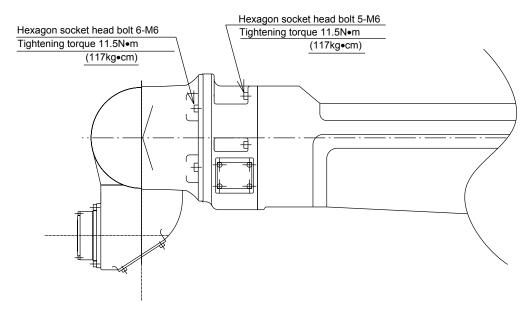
Wrist Fixing Bolts (for PX2750-B30)
